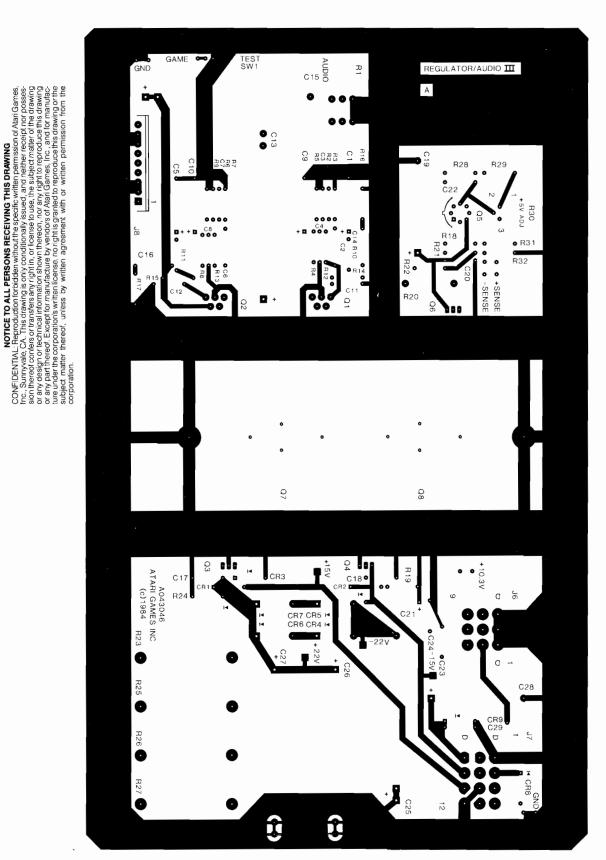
Regulator/Audio III Printed-Circuit Board Assembly A043046-01 A
